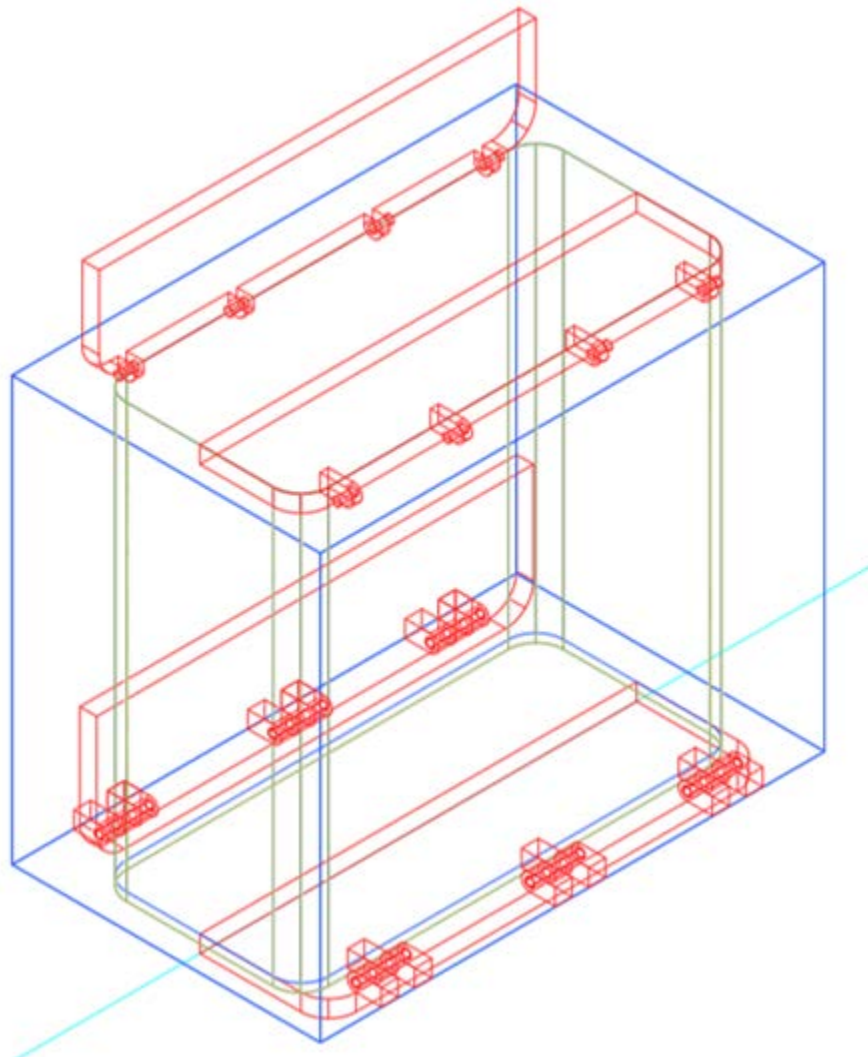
[3.595.9.1-1] Concept Sketch of Moonpool Door Openings
